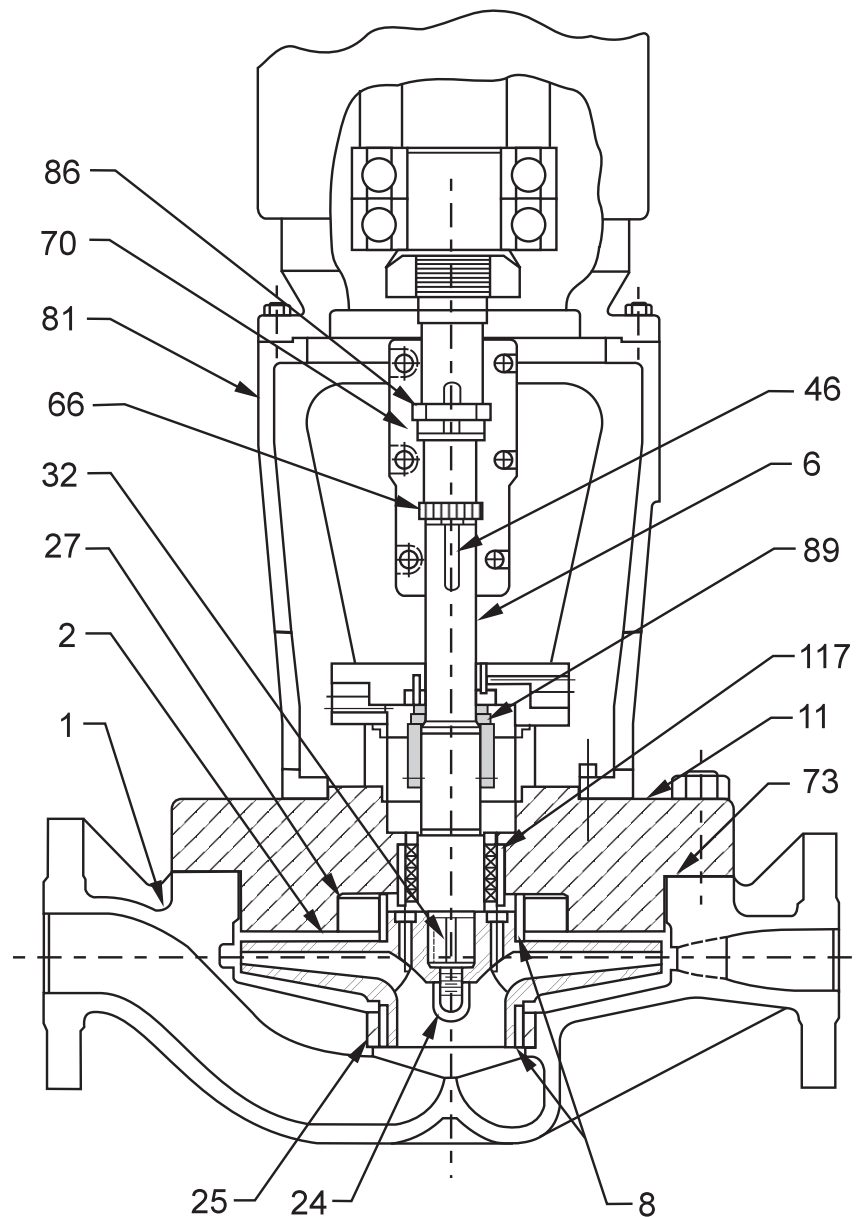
Cutaway drawing of a typical separately coupled end suction pump
